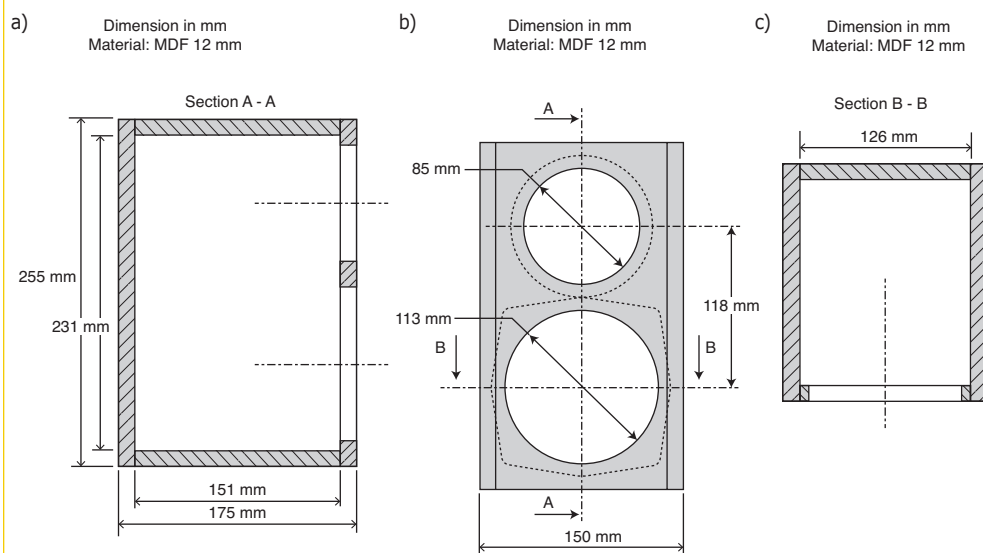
These design drawings for the enclosure are complete with all the measurements, assuming that 12-mm thick MDF board is used.
